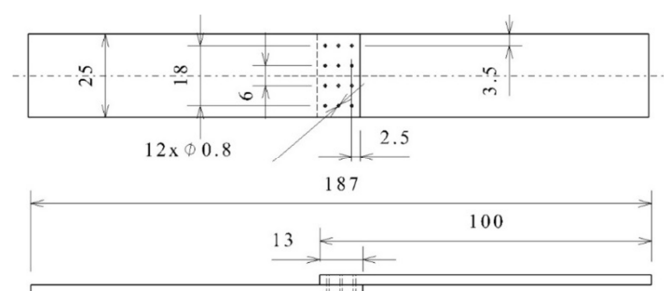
Geometry and dimensions of the single-lap joint (all dimensions in mm)
